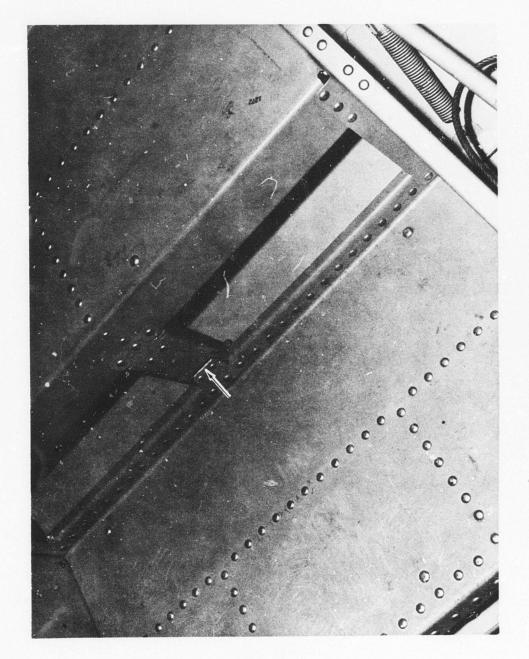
Lower Personnel Door, Redesign, Riser Fracture.
